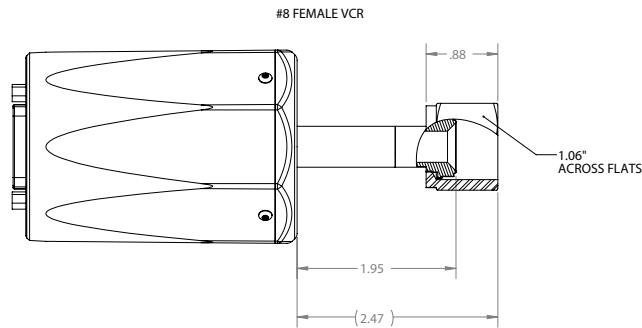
Outline drawing showing optional VCR™ style face seal vacuum fitting.
